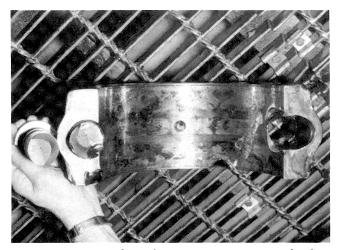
Fatigue Failure of an Upper Connecting Rod Bolt in a Large Reciprocating Engine. Two step fracture propagation initiated at the surface notch. The bolt was not pre-tensioned when installed, allowing it to cycle in axial tension.
